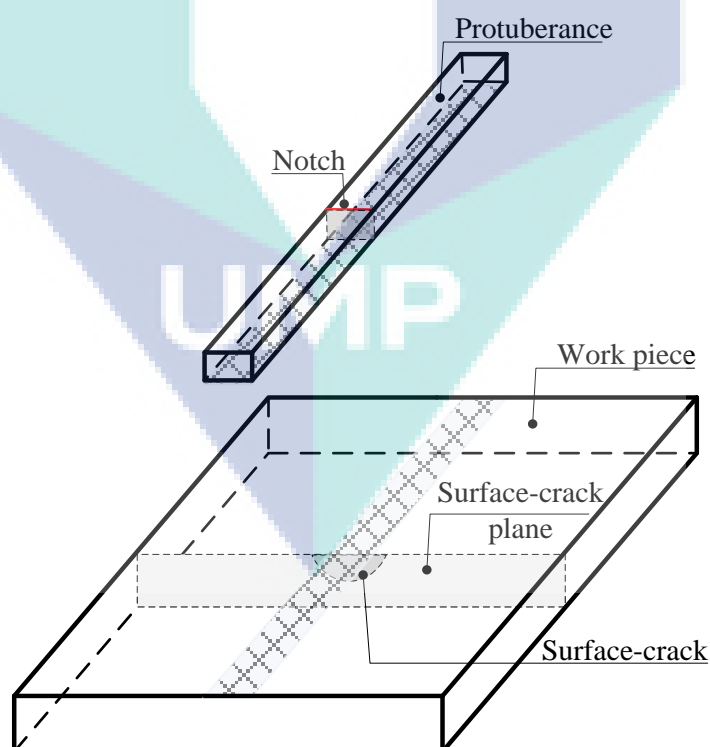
Surface crack remained in the work piece and the protuberance milled off
